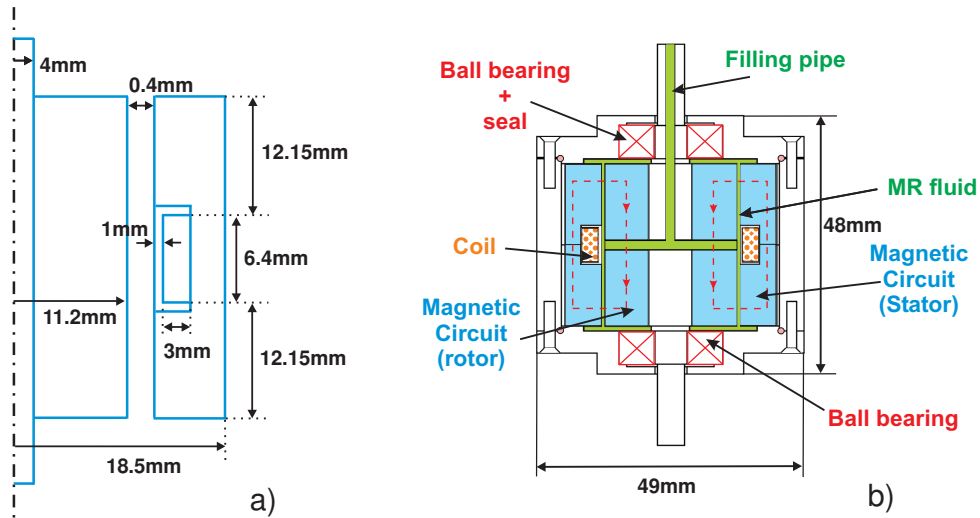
Drum brake prototype: a) magnetic core dimensions - b) schematic cross-section
